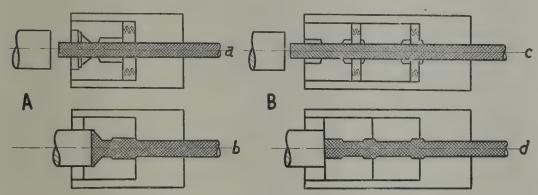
Design principles for sliding dies: A—Die for upsetting the end of the bar in two places: (a) Die in open position; (b) Die in close position; B—Die for upsetting the bar in three places: (c) Die in open position; (d) Die in close position
